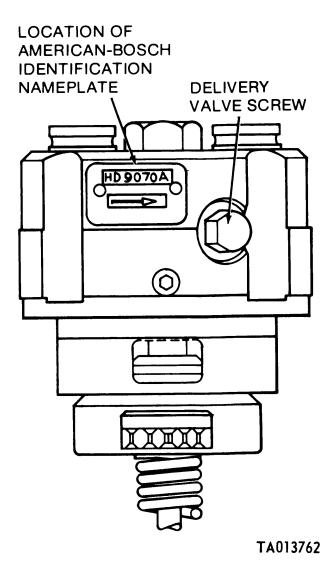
Identification of hydraulic head assembly HD9070A (2910-084-0259).
